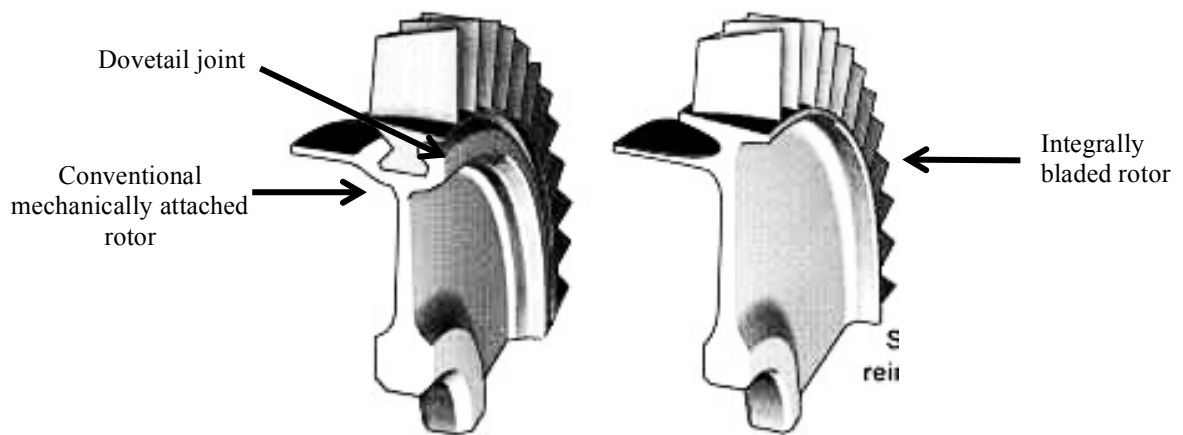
Comparison between (a) Conventional mechanically attached rotor and (b) Integrally bladed rotor designs (source: Soares 2008 [64])
